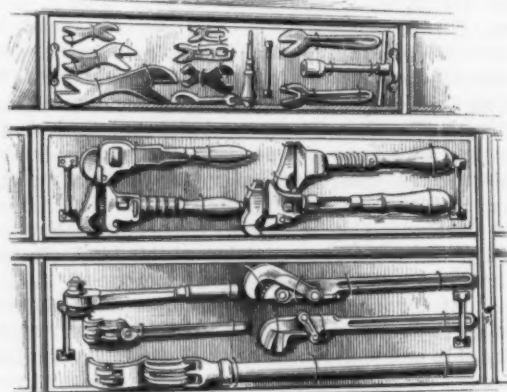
Sample Boards Fronting Bins in Which Wrenches Are Kept.
